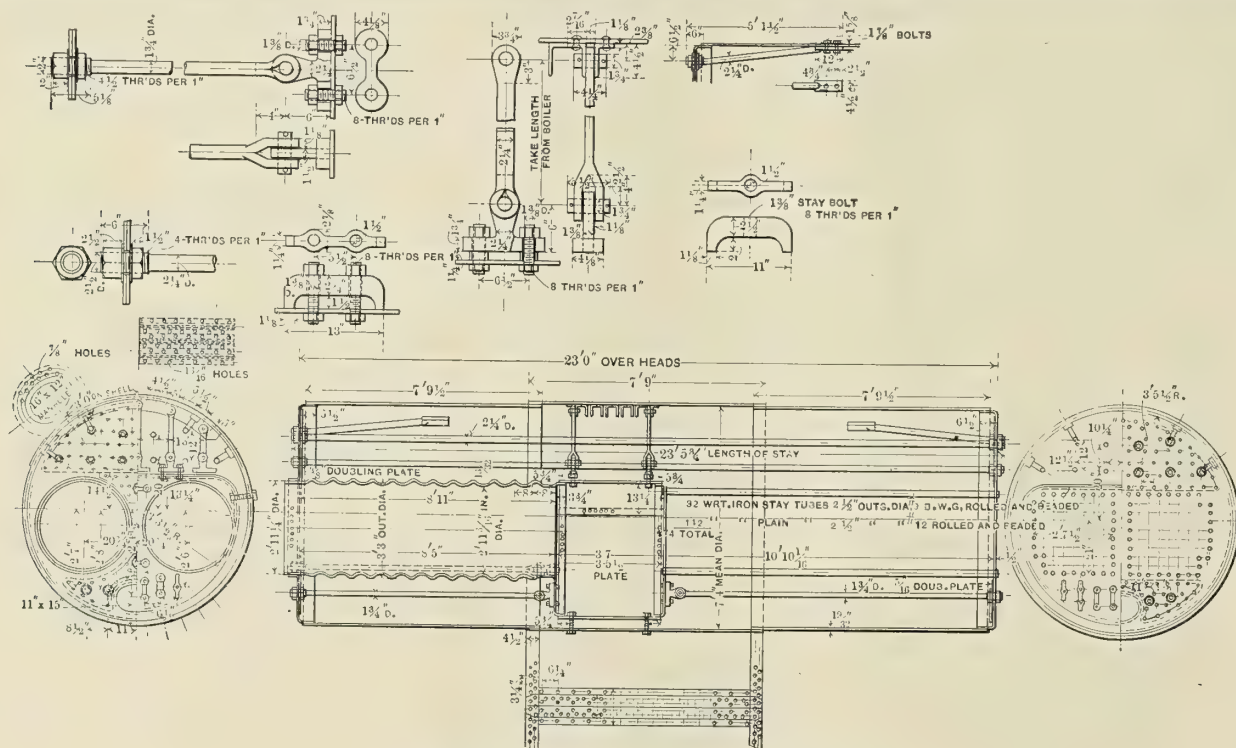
DETAILS OF GUNBOAT BOILERS ON THE BRANDYWINE.
